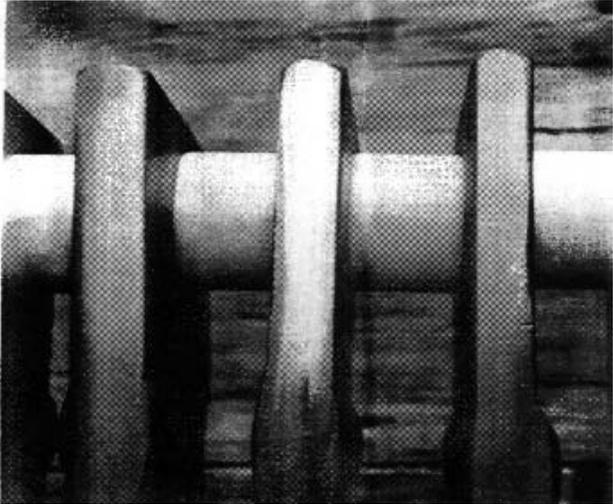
Close-up view of tight-crevice specimen arrangement.
